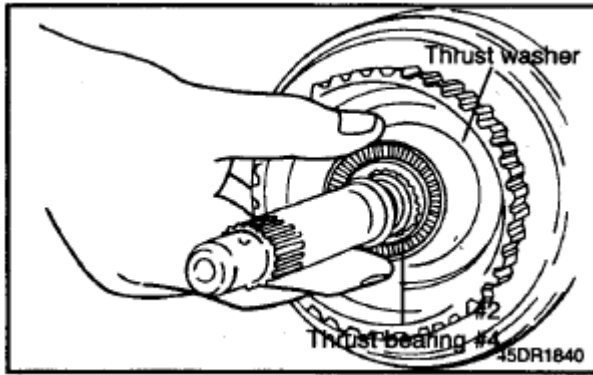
Identifying Thrust Bearing & Thrust Washer
